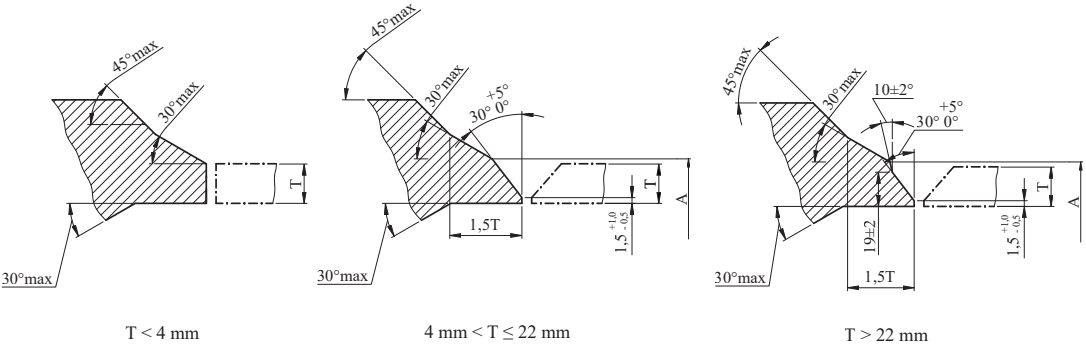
Form of the butt welding ends EN 12627
